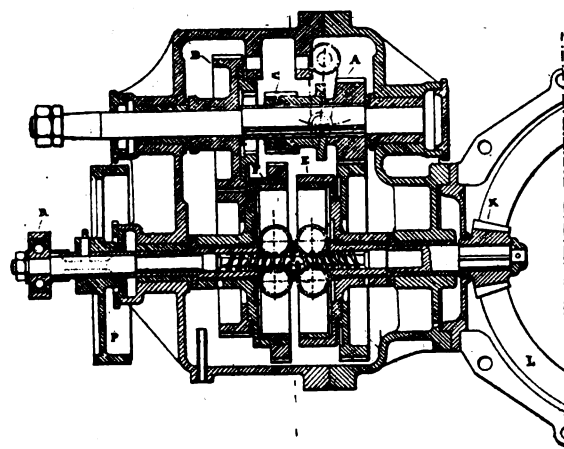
SECTION THROUGH DE DION CHANGE-SPEED GEAR BOX.
